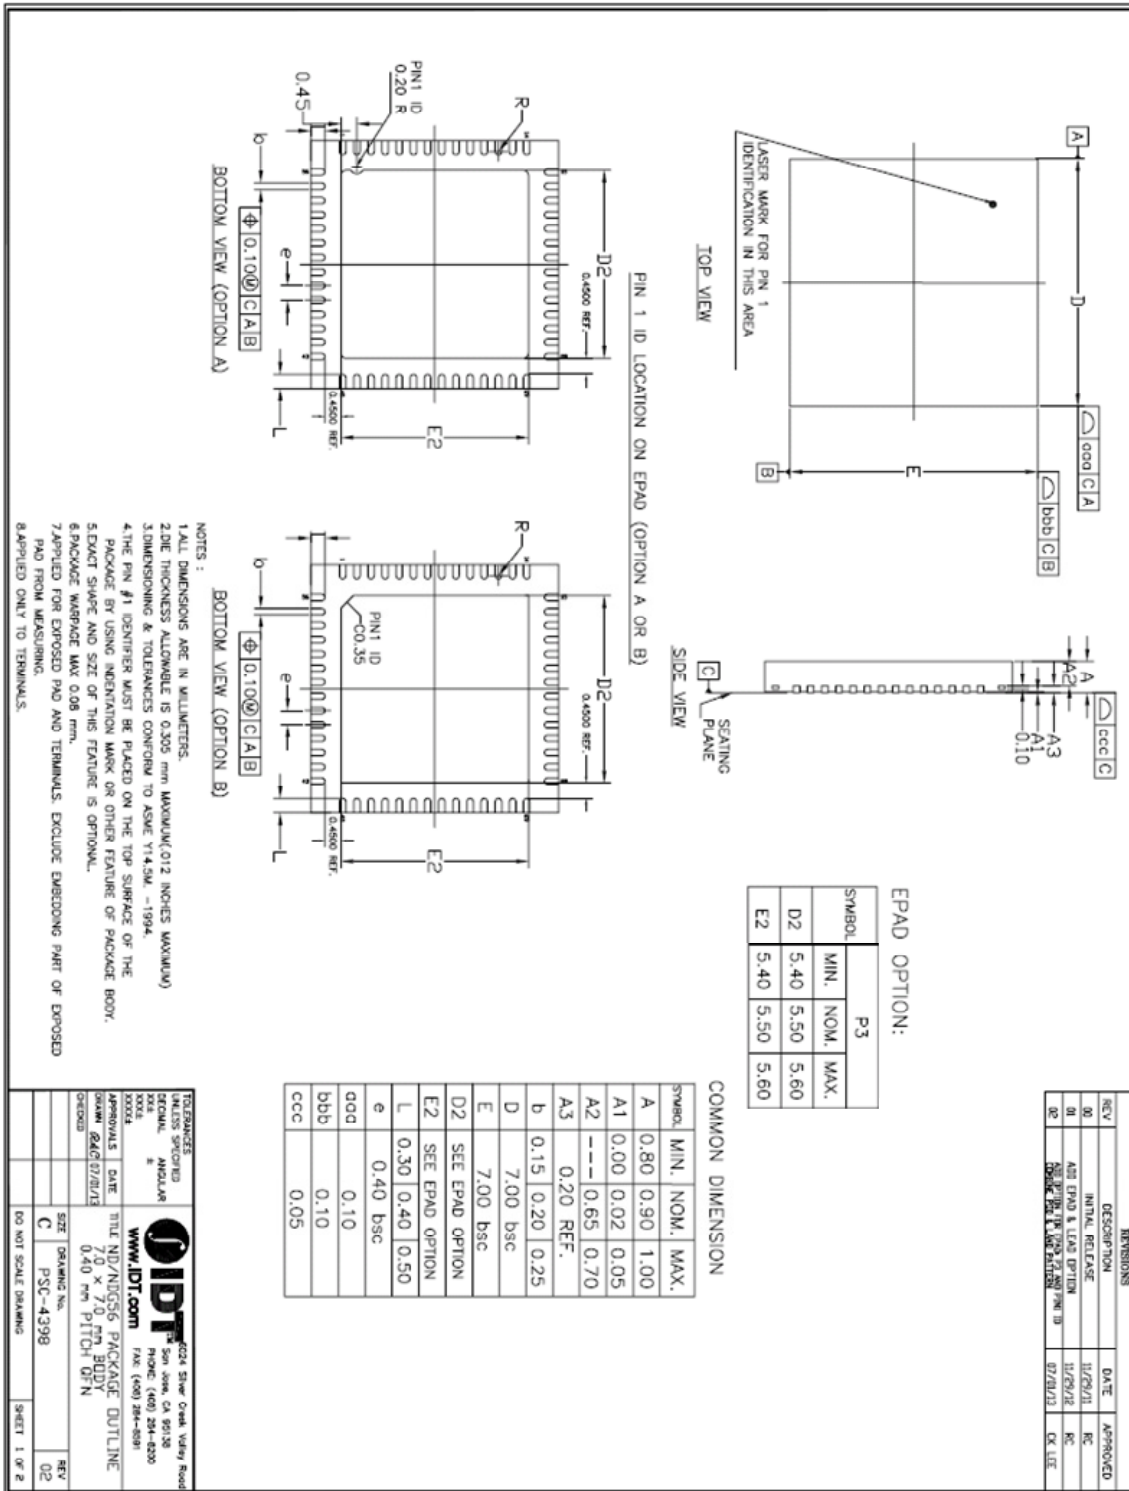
VFQFN-56 7mmx7mm Package Outline Drawing (POD) Page 1
